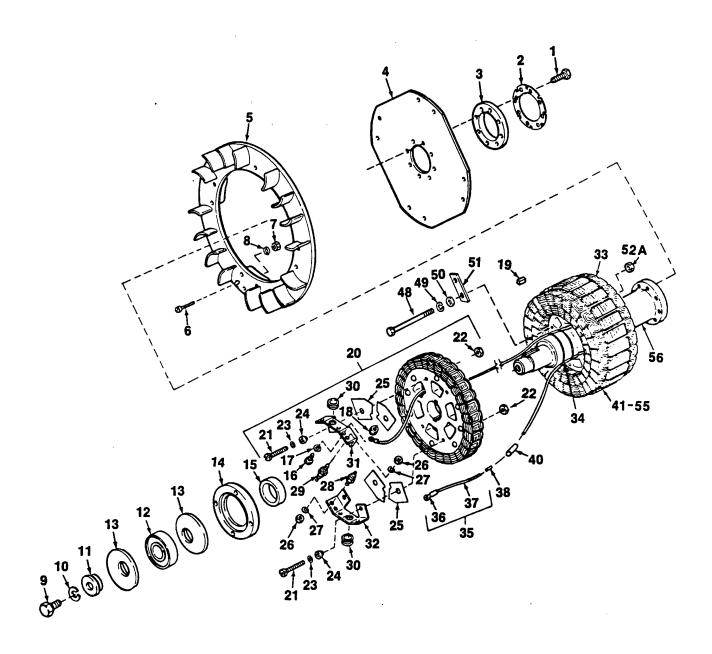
Exploded view of conventional 1,800 RPM alternator for military gen-set
